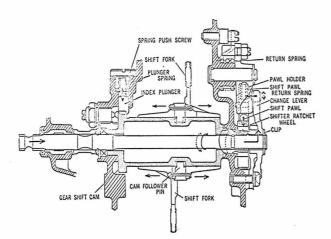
Cross sec tional view of gear shift mechanism used on YA-6.
